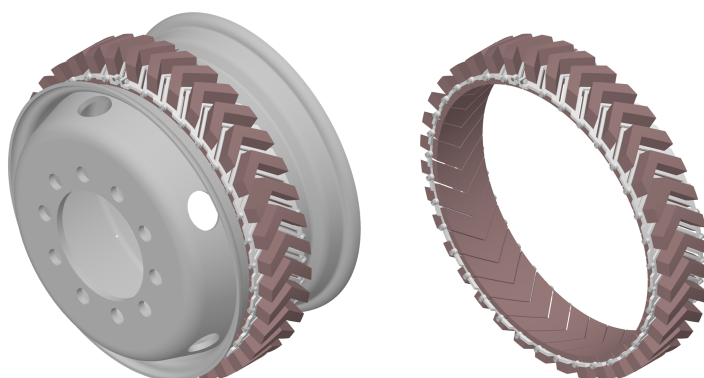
3D CAD model of Hero-Belt system: including wheel rim (left), without wheel rim visibility (right).
